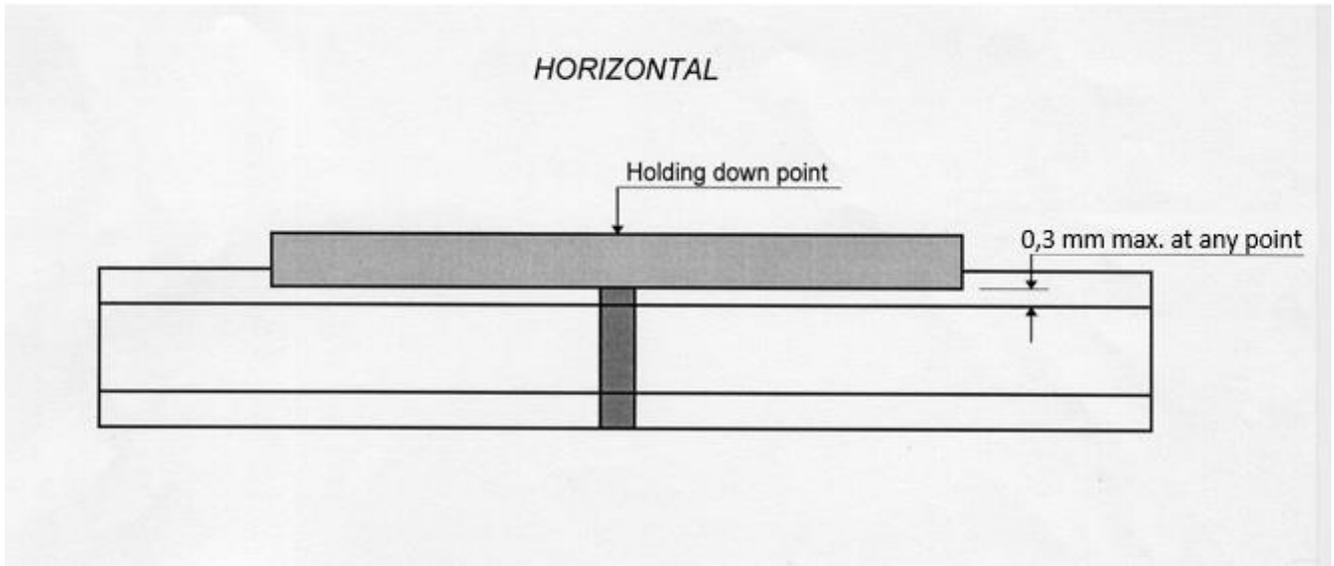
Straightness of flash butt joints after press and grinding using a 1m straight edge
